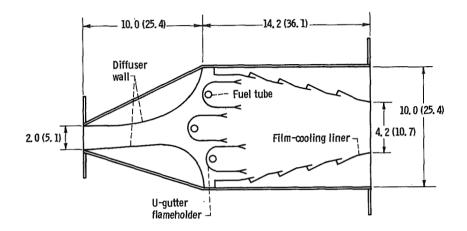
Combustor installation in 10- by 15-inch (25.4- by 38.1-cm) rectangular test section. (Dimensions are in inches (cm).)
